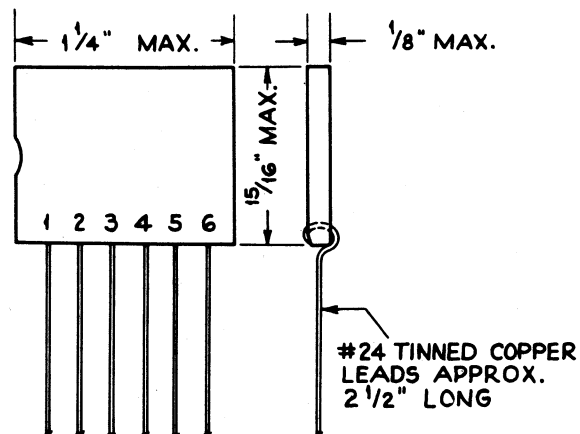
Physical configuration of the printed circuit used in the Firestone 4-C-13.
